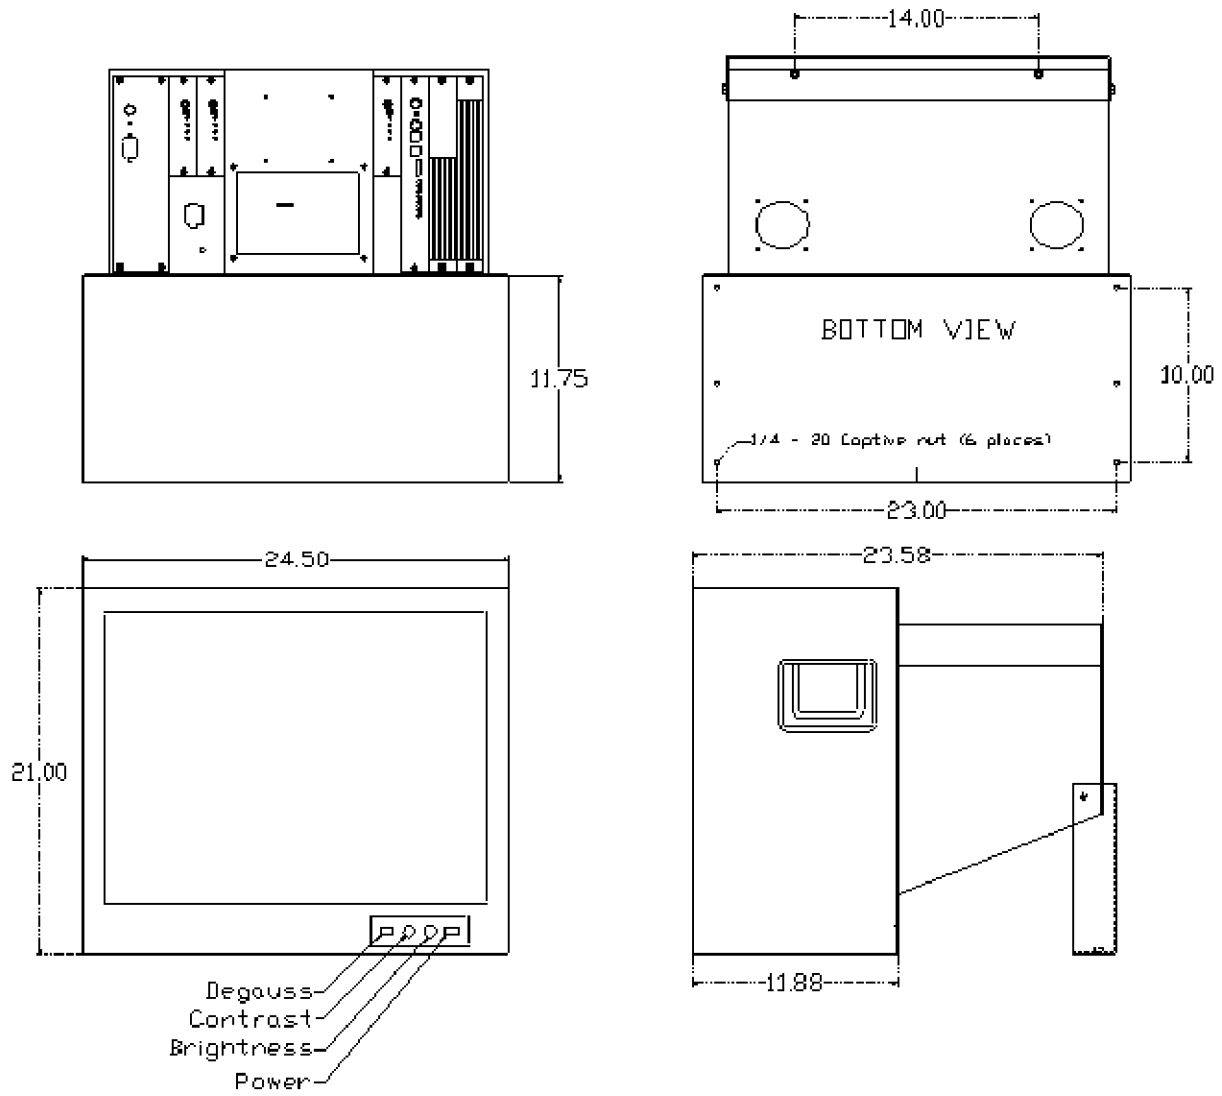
MODEL 5127 OUTLINE DRAWING AND FRONT PANEL CONTROLS
